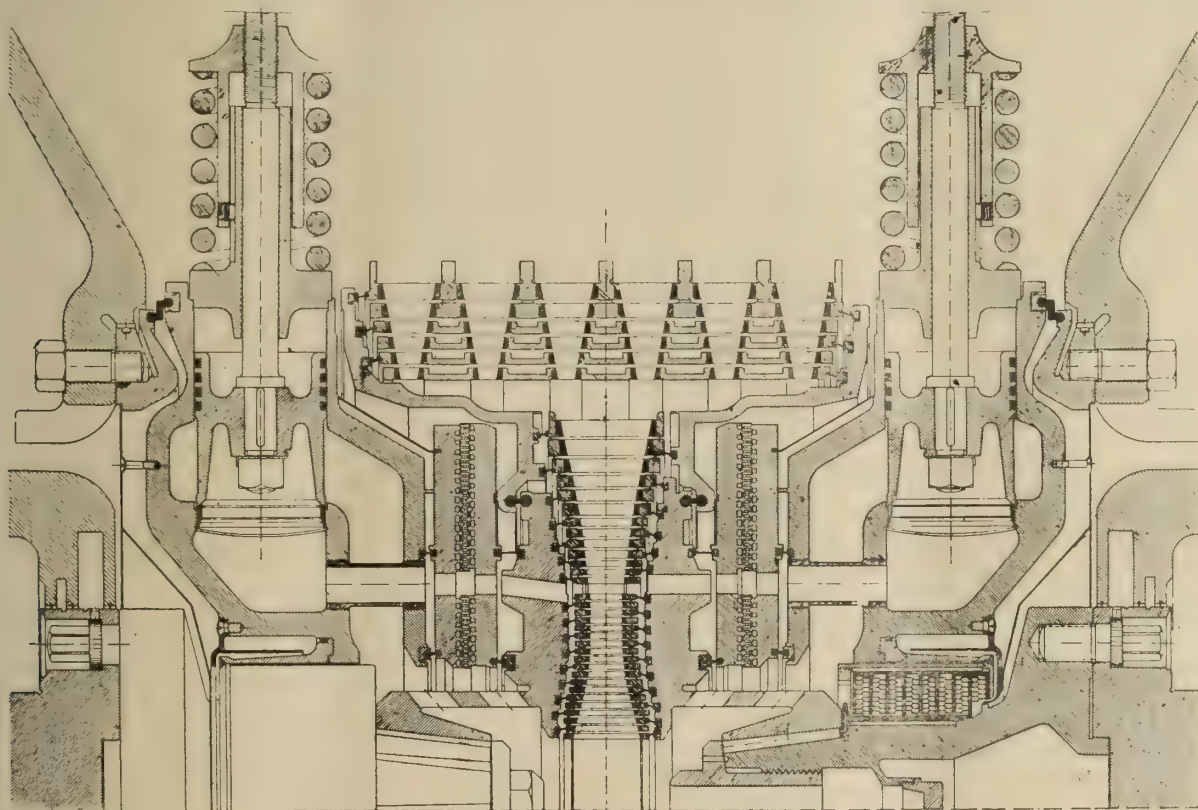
SECTION OF UPPER PART OF A LARGE TURBINE.
